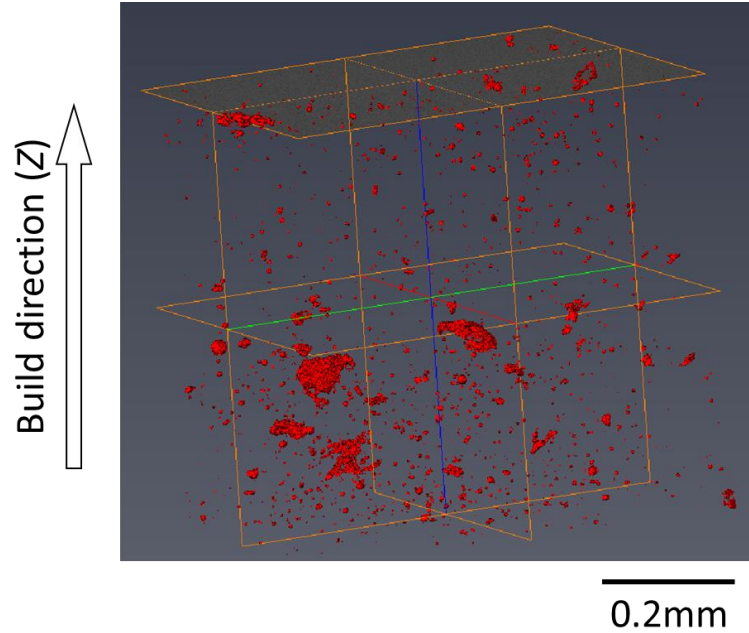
An example of reconstructed sample built with a standard hatch spacing of 0.19mm.
